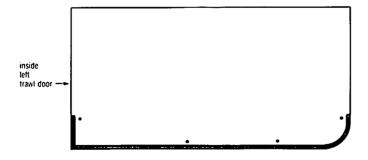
Lumber braces reinforce the top, bottom and length of the outside of the door. The iron or shoe is bolted to the door flush with the inside (the unbraced side) of the door.
